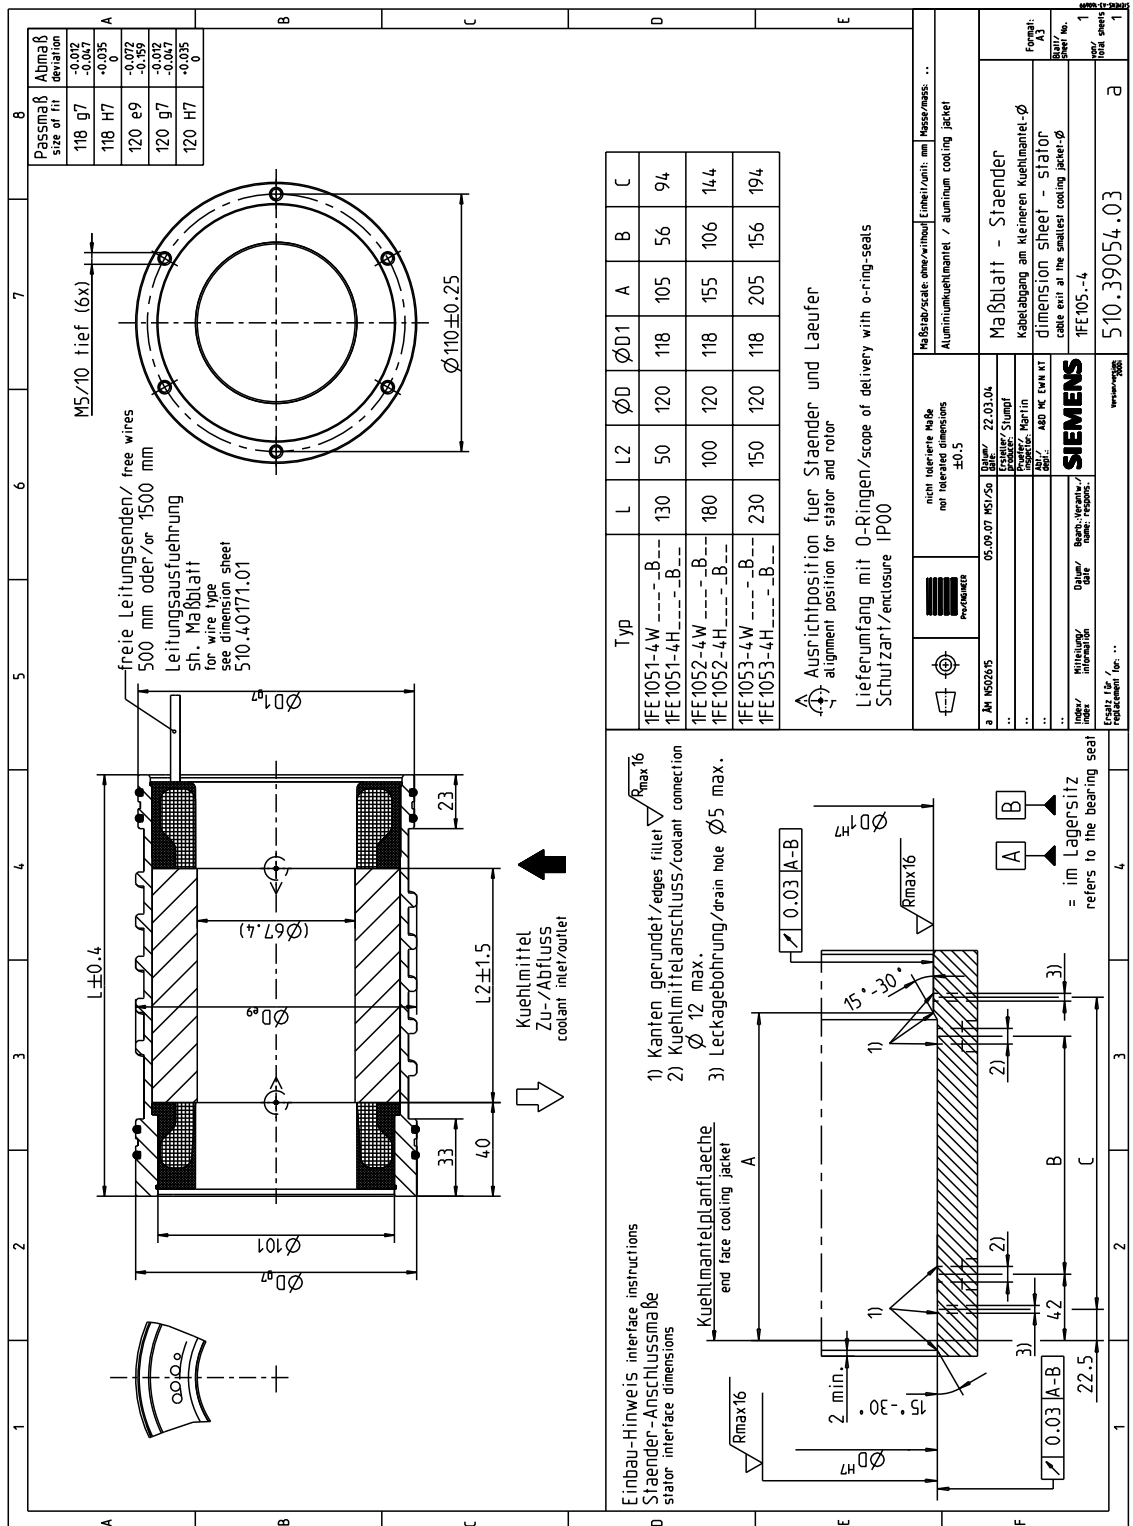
1FE105-4, stator with cooling jacket, cable outlet at the smaller cooling jacket diameter
